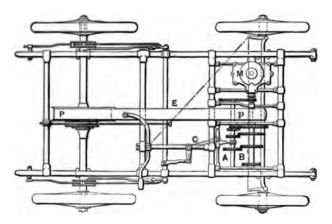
THE UNDERBERG VOITURETTE--PLAN.
